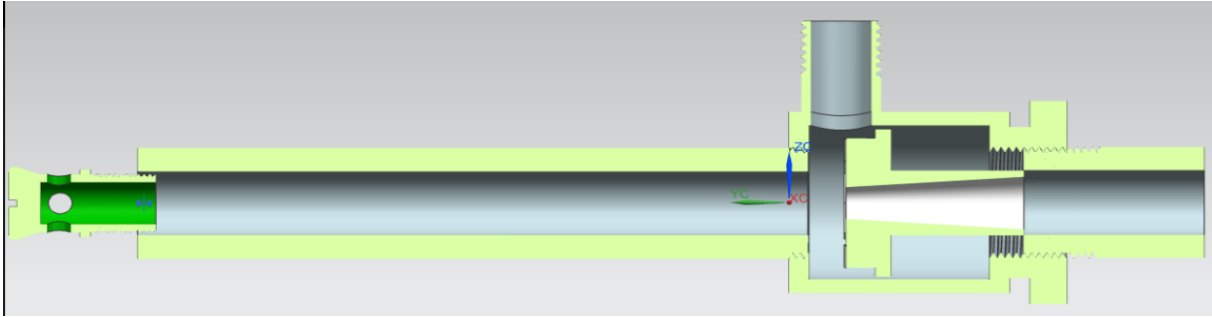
A Complete Sectional View Of The Rhvt Tube Showing The Air Inlet, Air Out Let And Turbulator Is Seen In An Assembled Section.
